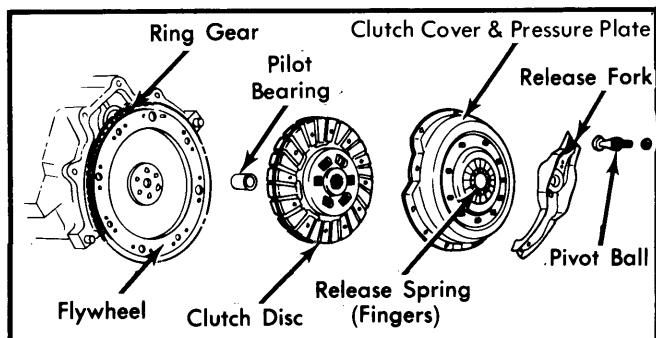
Exploded View of Clutch Assembly (All Models Except Escort, EXP, LN7 & Lynx)
